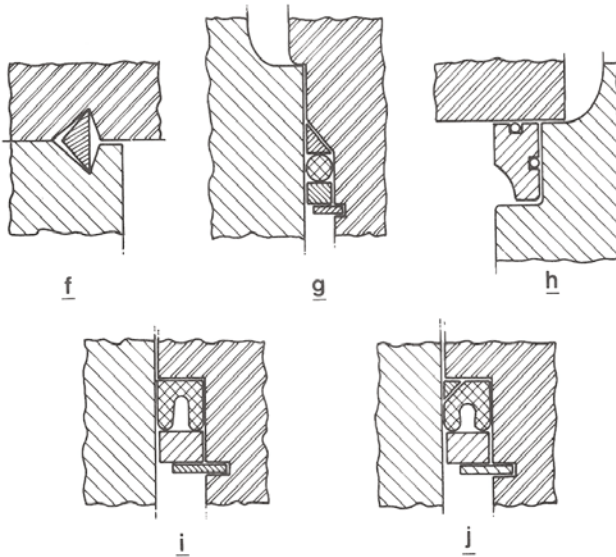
Types of seal designs: (f) delta-ring seal, (g) O-ring with anti-extrusion rings, (h) double O-ring with full bore opening, (i) U-ring seal, (j) U-ring with anti-extrusion ring.
